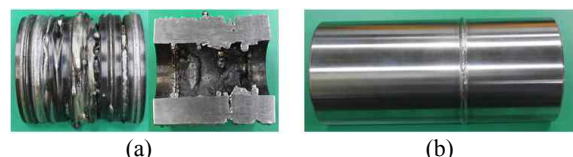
Test specimens for EB weld (a) checking the penetration depth (b) simulating the butt welding
